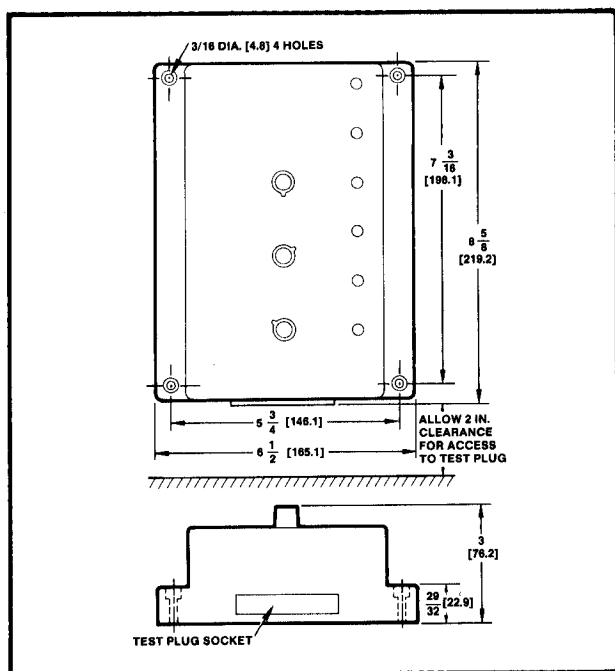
W7100 DISCHARGE AIR OR WATER CONTROLLER MOUNTING DIMENSIONS IN in. (mm IN BRACKETS).
